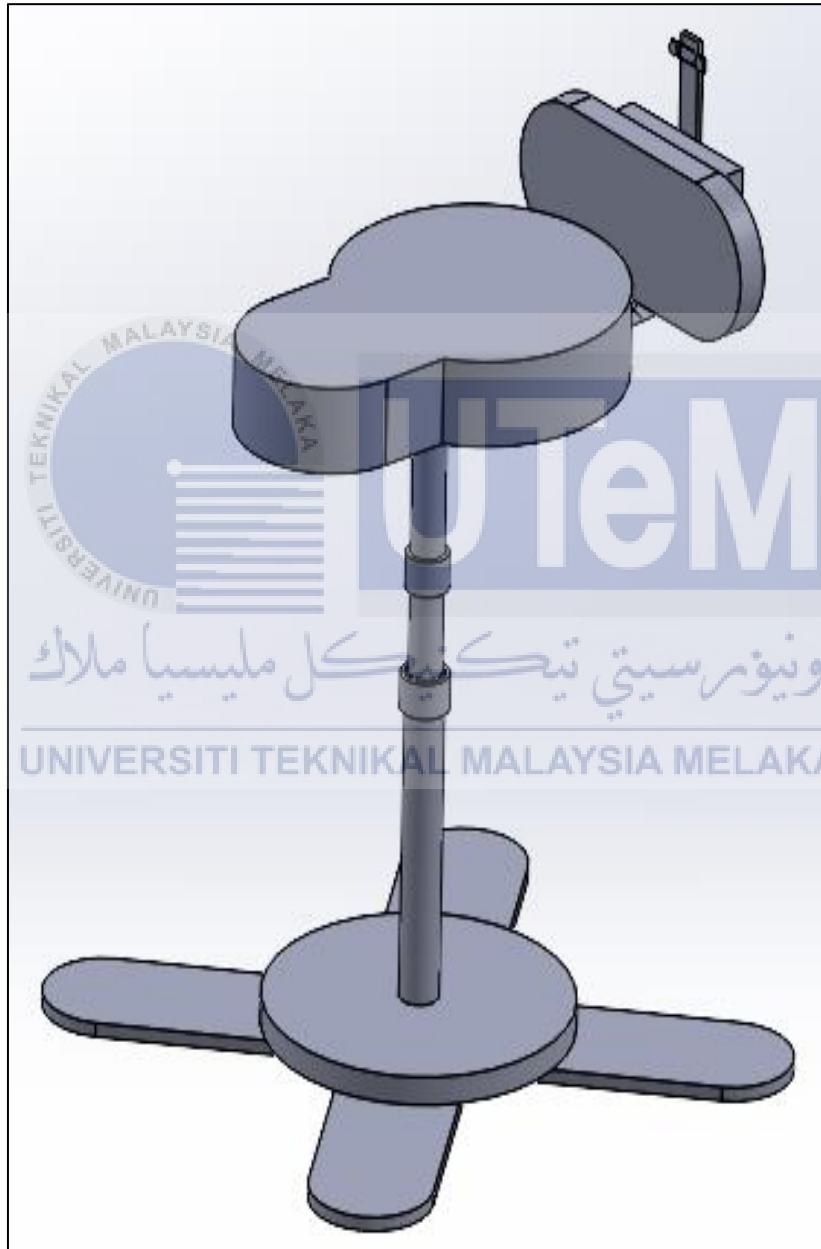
Design 2 of Smart Modular Lower Body Support
